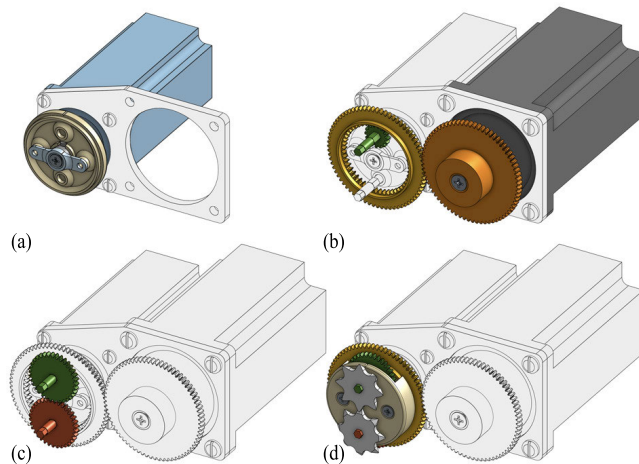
CB drive construction by layers. (a) Rear half of case with module-rotating drive, (b) Sprocket-rotating drive and gear transmission up to the sprocket axis, (c) Sprocket axis with gears, (d) Entire assembly with sprockets.
